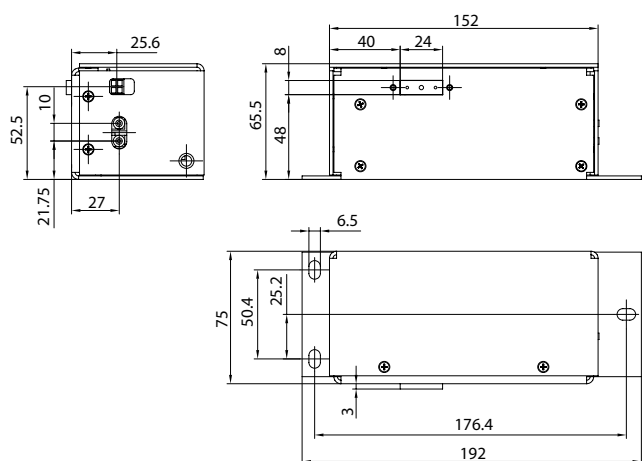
Outline drawing of encased version DPB-10 and DPB-5 drivers with PS-5 power supply
